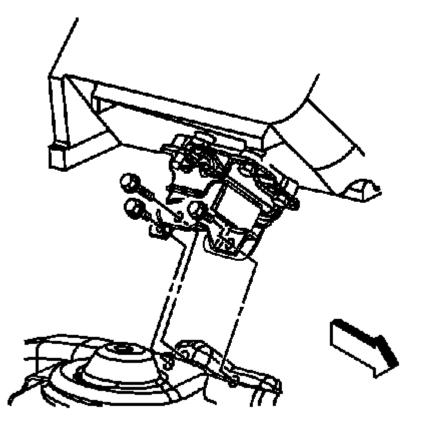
View Of Right Side (Left Side Similar) Engine Mount To Engine Mount Bracket Bolts Courtesy of GENERAL MOTORS CORP.
